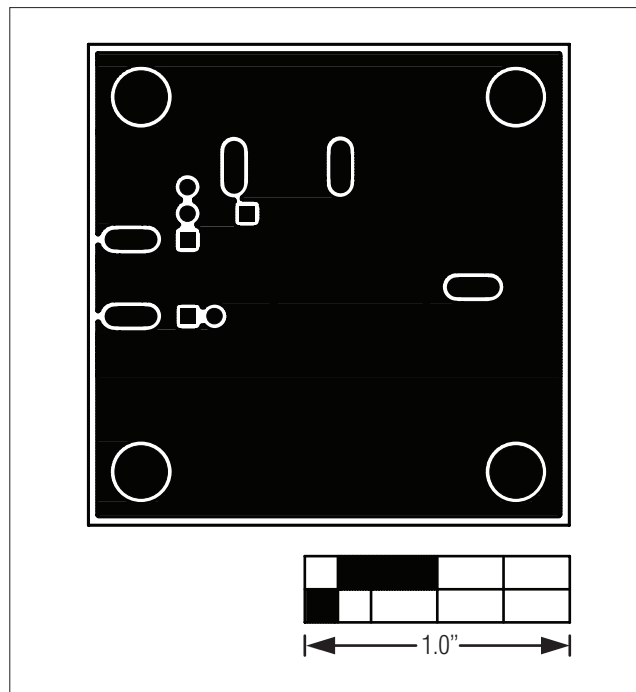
MAX4470 EV Kit PCB Layout—Solder Side
